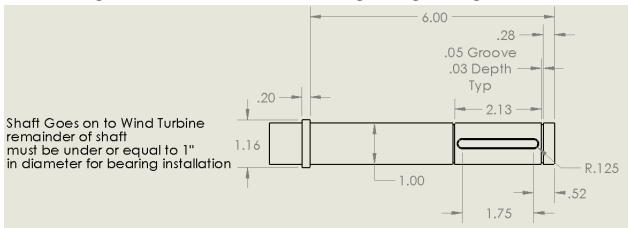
Gear Train End of Turbine Shaft, Shaft One Engineering Drawing in Inches
